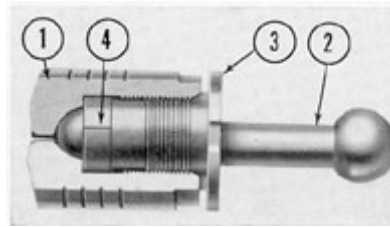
Cutaway of piston assembly. 1) Piston; 2) connecting rod; 3) cap nut; 4) socket cap.
